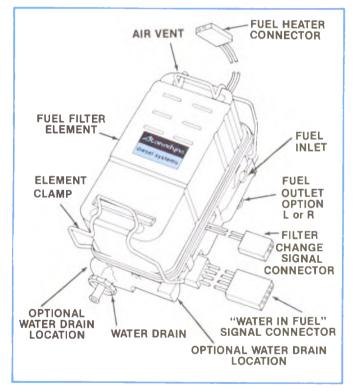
, Model 80 Fuel Filter and Base Assembly.
